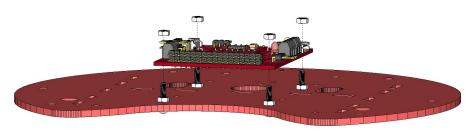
Mounting the Circuit Board, this step may be performed after the robot assembly is completed
